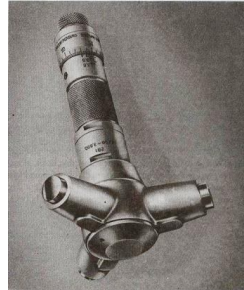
The Intramik, which has three contact points, measures holes accurately. (Courtesy Brown & Sharpe Co.)
